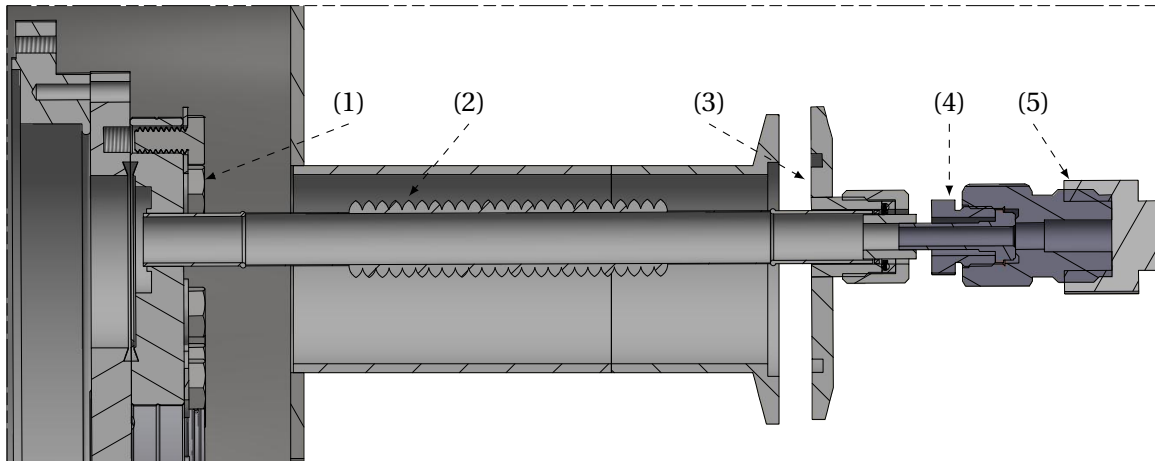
Cross-section CAD drawing of the pressure feedthrough. From left-to-right, (1) ConFlat fitting, (2) bellows and tube, (3) KF-to-Quick-Coupling fitting, and (4) VCR gland with split nut, which is attached to the (5) pressure gauge with a $\frac{1}{4}$ inch-to- $\frac{1}{2}$ inch VCR adapter.
